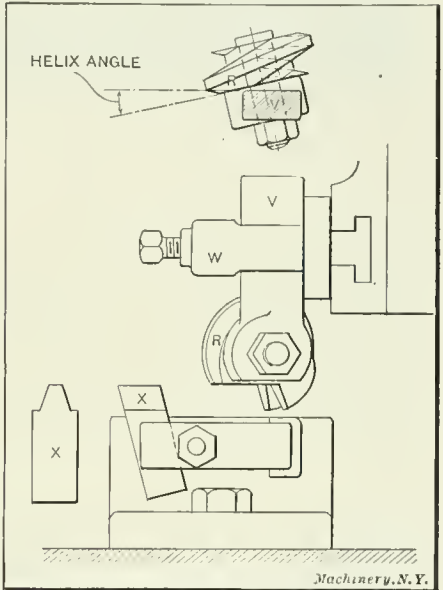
Using a Section of the Master Worm of Fig. 11 as a Tool for Shaping the Forming and Relieving Tool used in making a Corrected Hob
